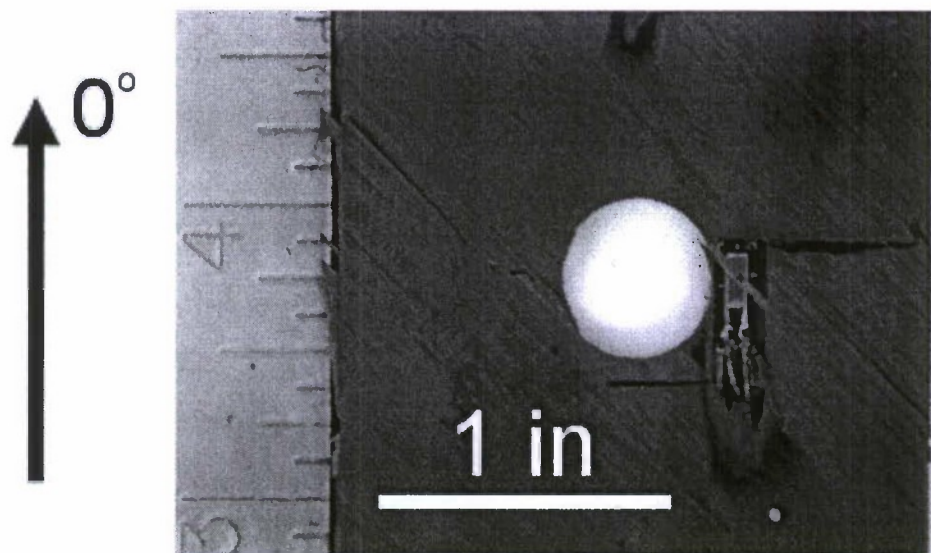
Photograph of the failed open-hole tension specimen OH-A051-01, with hole diameter of 0.5 inches.
